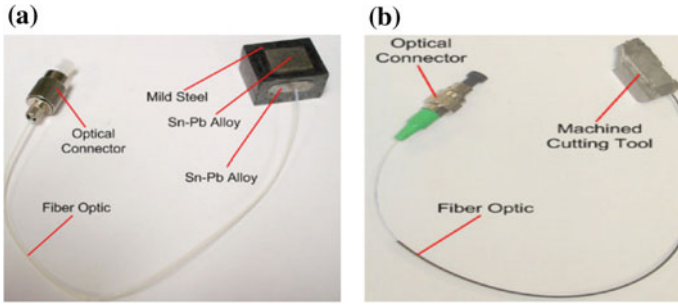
The embedded FBG cutting tool in a the physical model by casting method and b laser free molding manufacturing method
